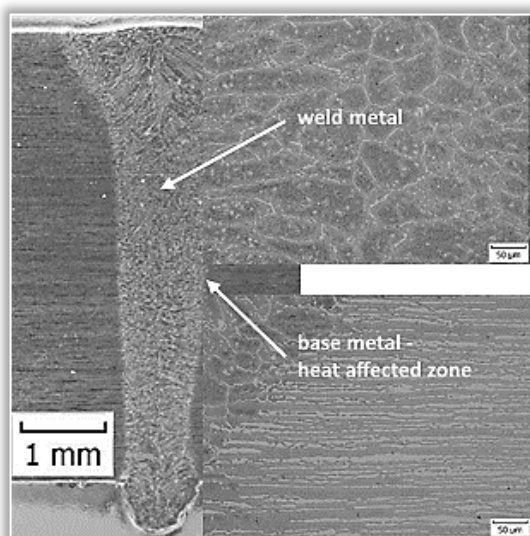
Microstructure of the EB welded duplex stainless steel plates (30 mm.s^{-1} welding speed and average oscillation 1 mm)
